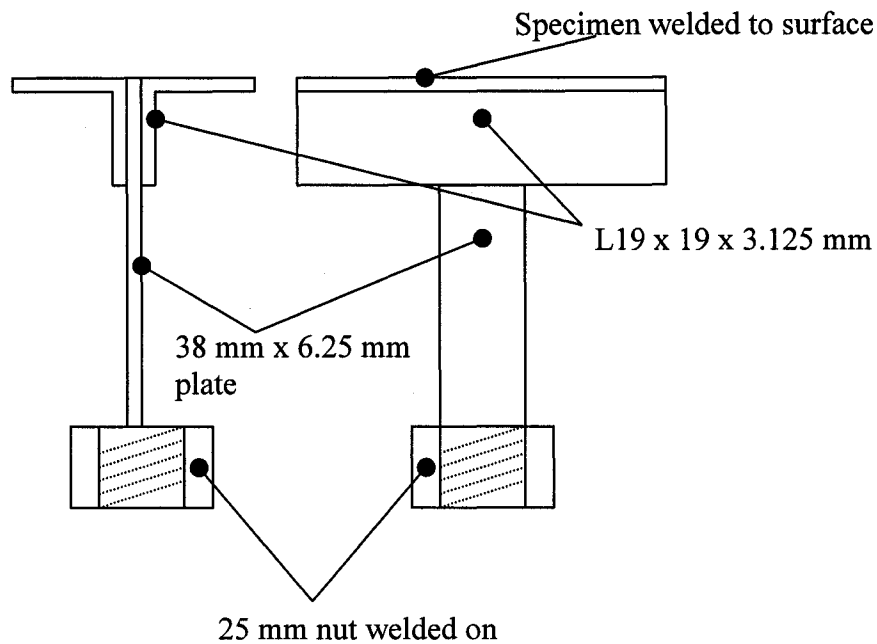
Assembly used to pull Bearing Plate in Tension
